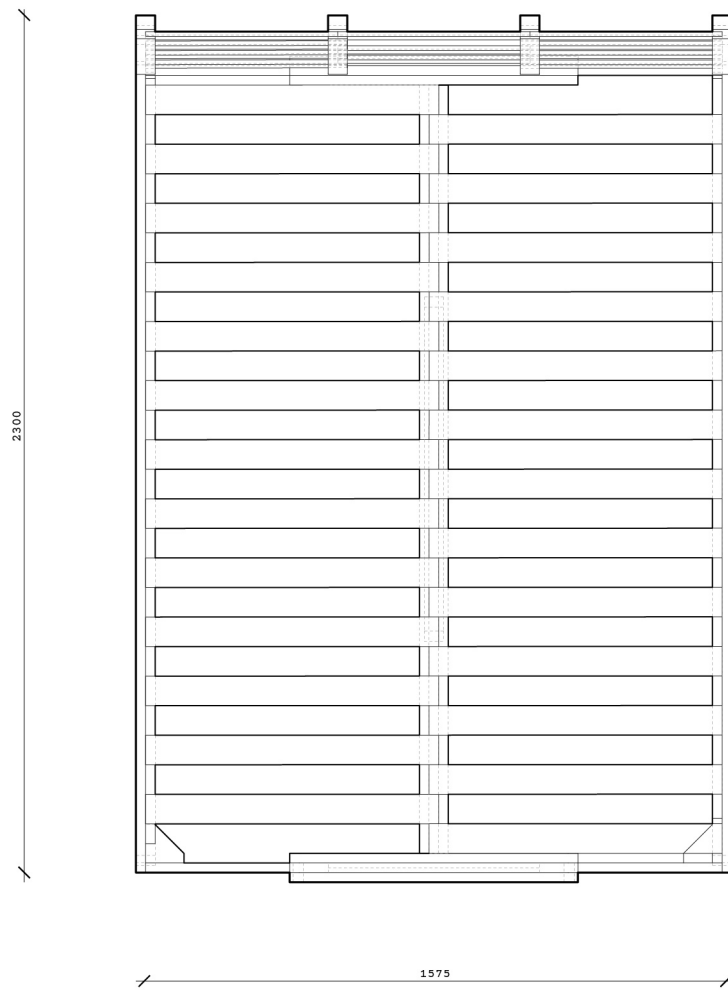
Bed Plan - Queen Size, Drawing by Author
